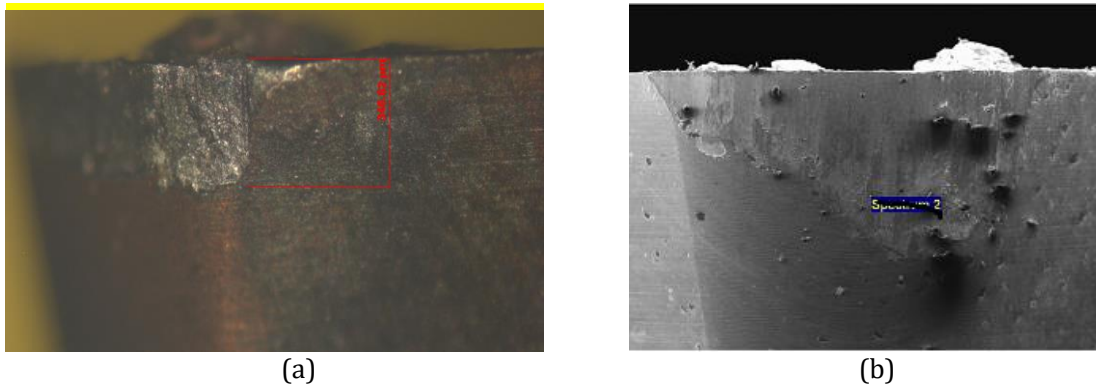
Typical flank wear image of cutting tool using (a) an optical microscope and (b) SEM.
